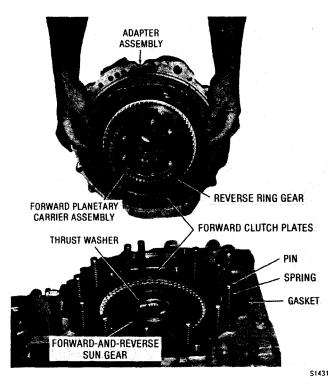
Removing adapter assembly and attached parts (TRT 2221-3, 2421-3 with underdrive)
